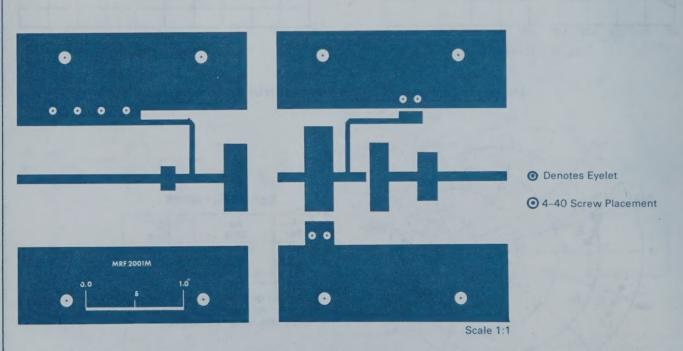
PRINTED CIRCUIT BOARD LAYOUT — 2.0 GHz TEST CIRCUIT
